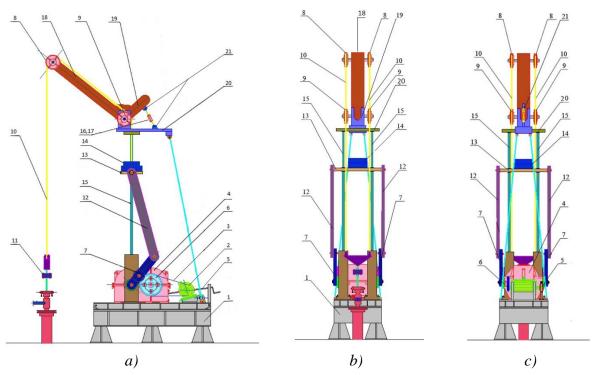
New constructive solution of beamless pumping unit consisting of an slider-crank mechanism and a rope-block system: a - side view; b - front view; c - rear view
